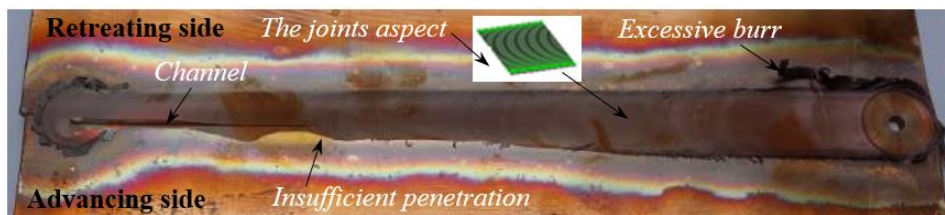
The aspect and surface defects of FSW and FSW-TIG joints
